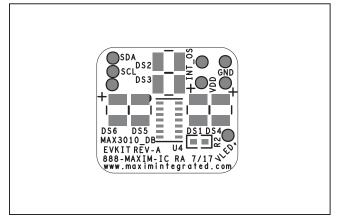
MAX30102 Daughter Board PCB Layout—Solder Side
